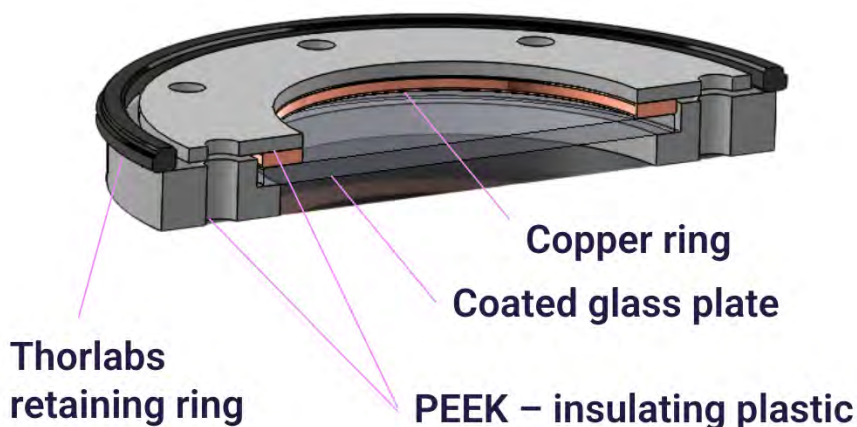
Cross-sectional drawing of electric field plate mount.
